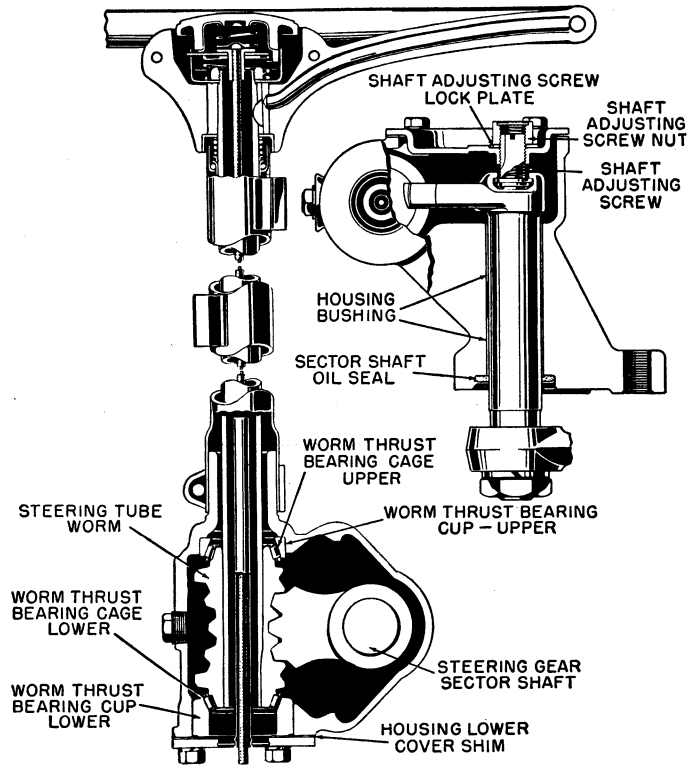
Gemmer worm and sector steering gear. Power Wagon and Route Vans
